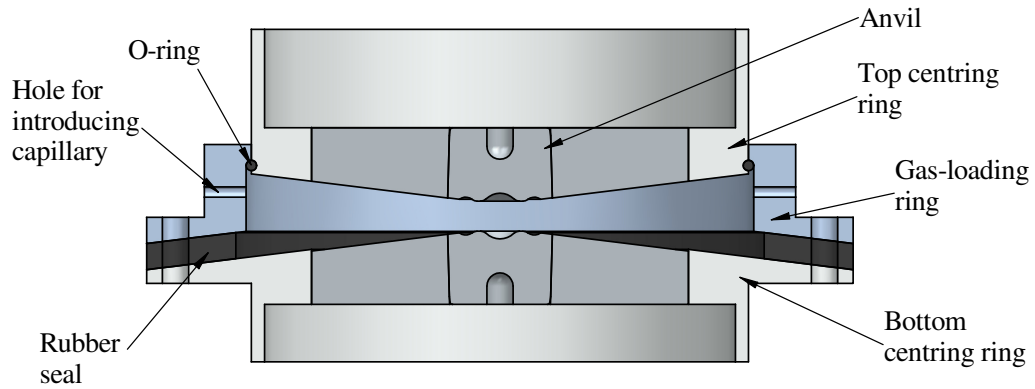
Design of a gas-loading ring which slides along the top anvil of the PEC. The top centring ring has a small groove for fitting an o-ring; the bottom centring ring has a flanged shape which matches the shape of the loading ring.
